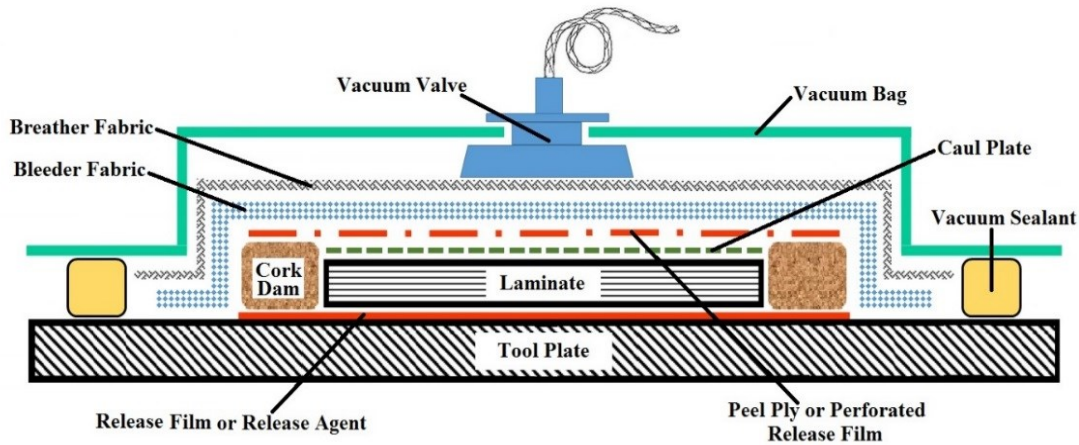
Vacuum bag assembly for laminate manufacturing in oven.
